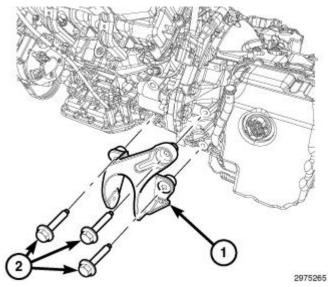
Front Engine Mount Bracket & Bolts Courtesy of CHRYSLER GROUP, LLC
